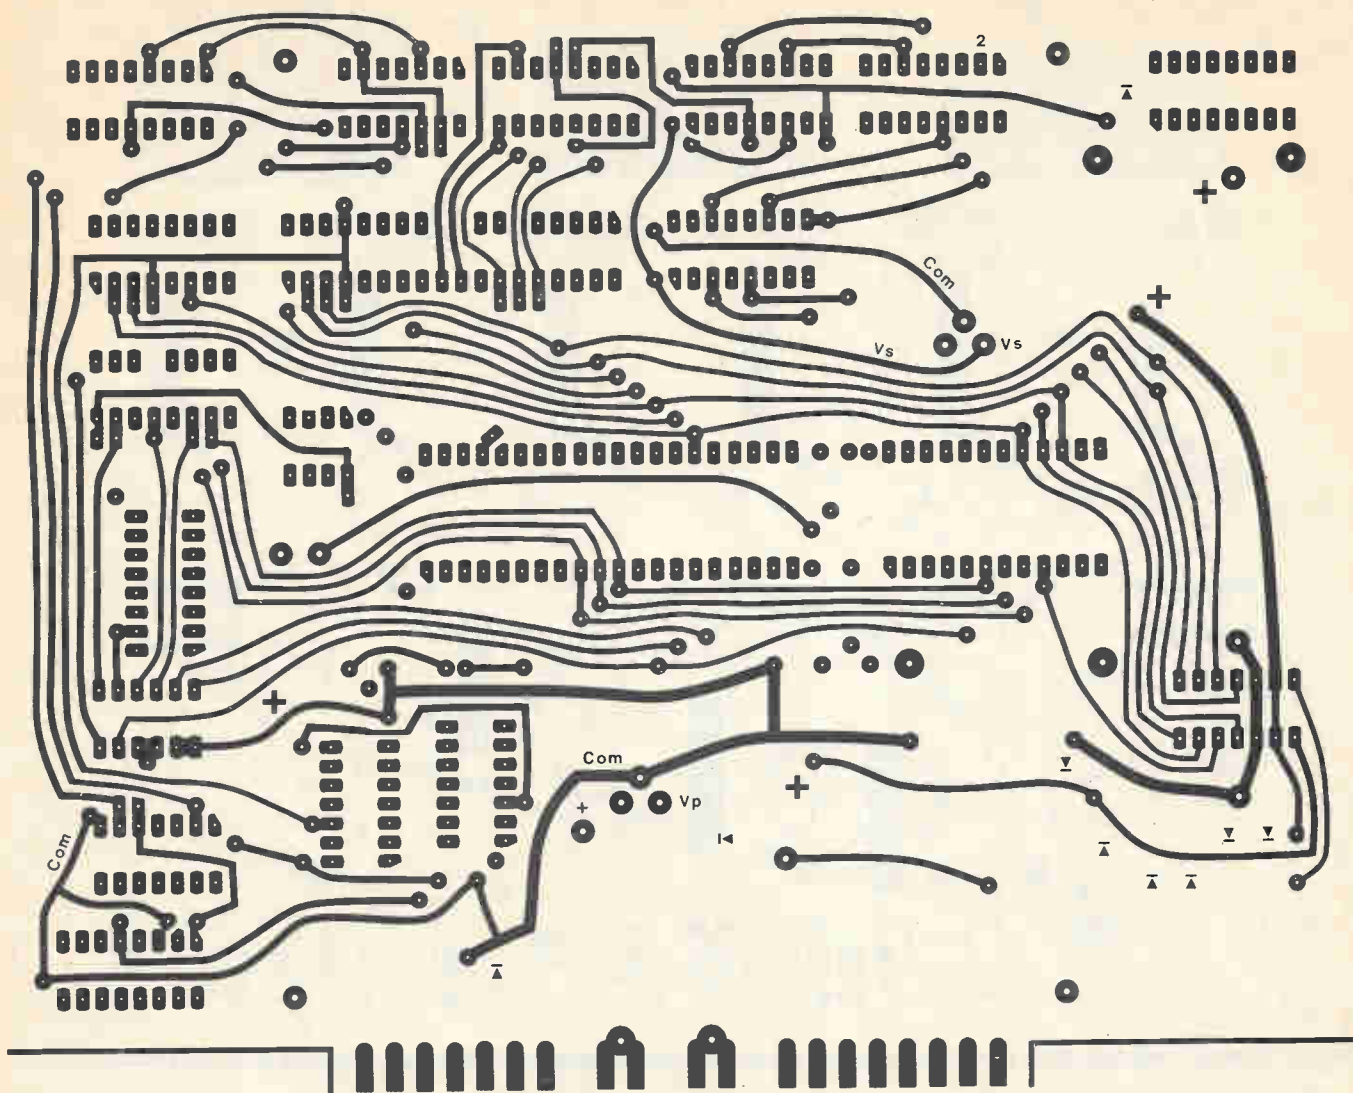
MICROPROCESSOR printed-circuit board front foil pattern shown same size.
